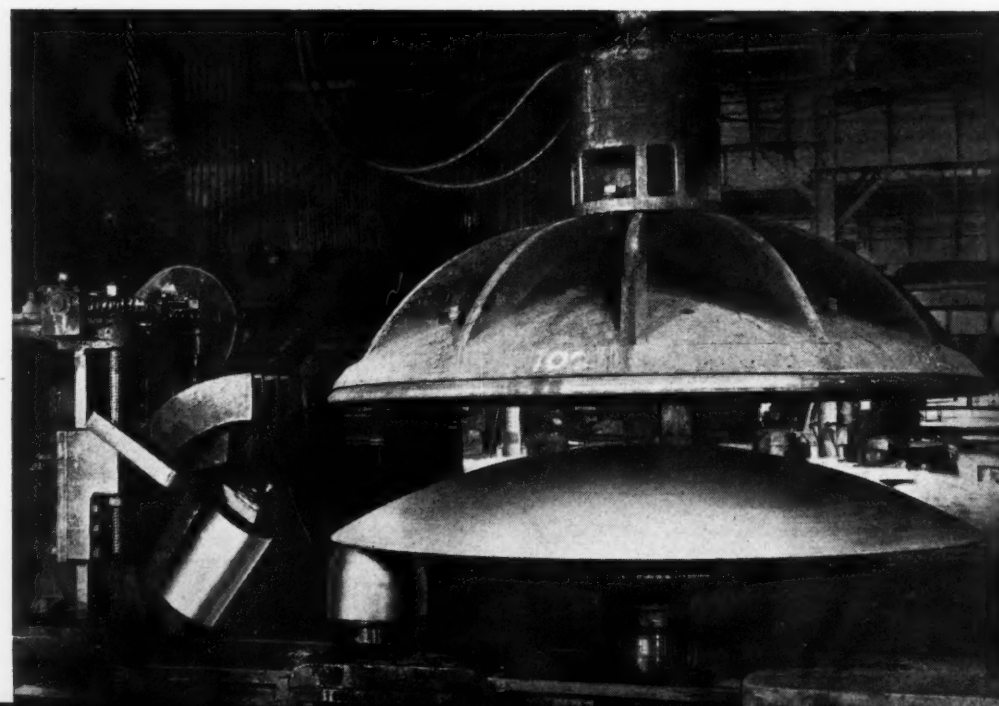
Close-up View Showing Upper Former Mounted on Vertical Hydraulic Ram, Bottom Former Mounted on Spindle Jack, and the Inner and Outer Rollers
